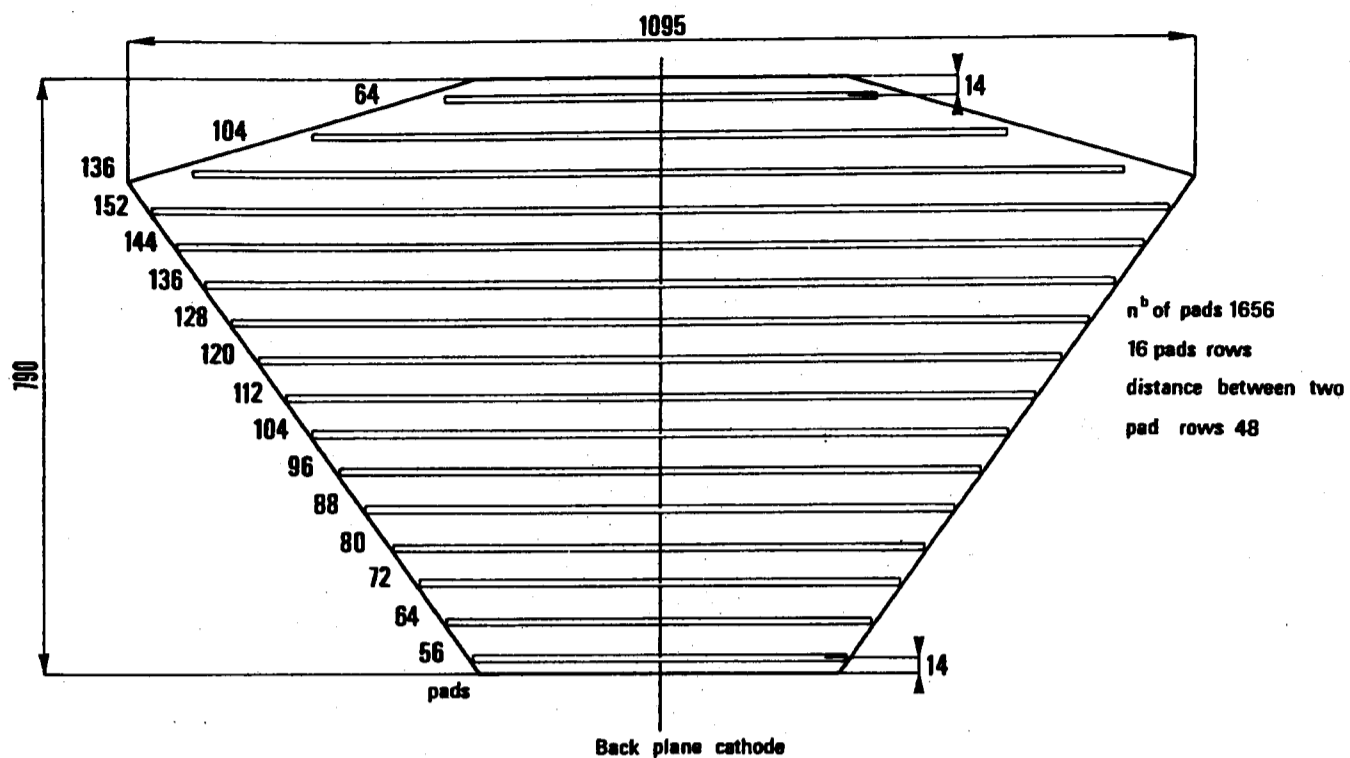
A detailed view of one of the 6 sector plates. Dimensions in mm.
